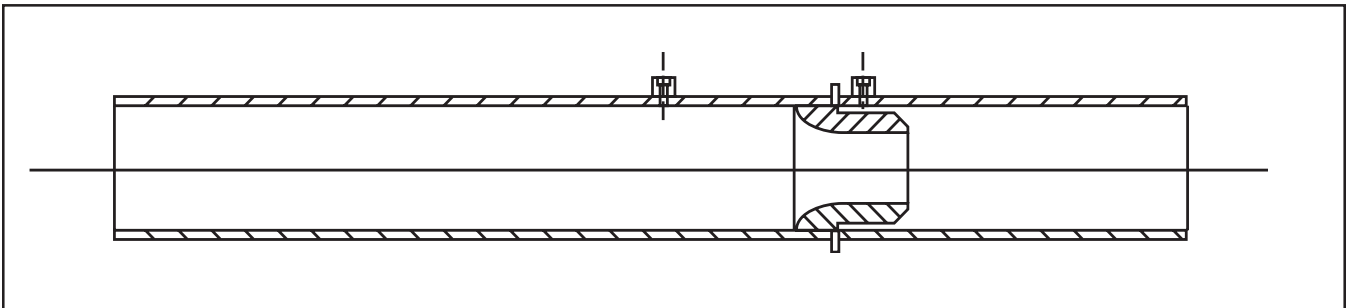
Flow section with weld-ring flow nozzle
